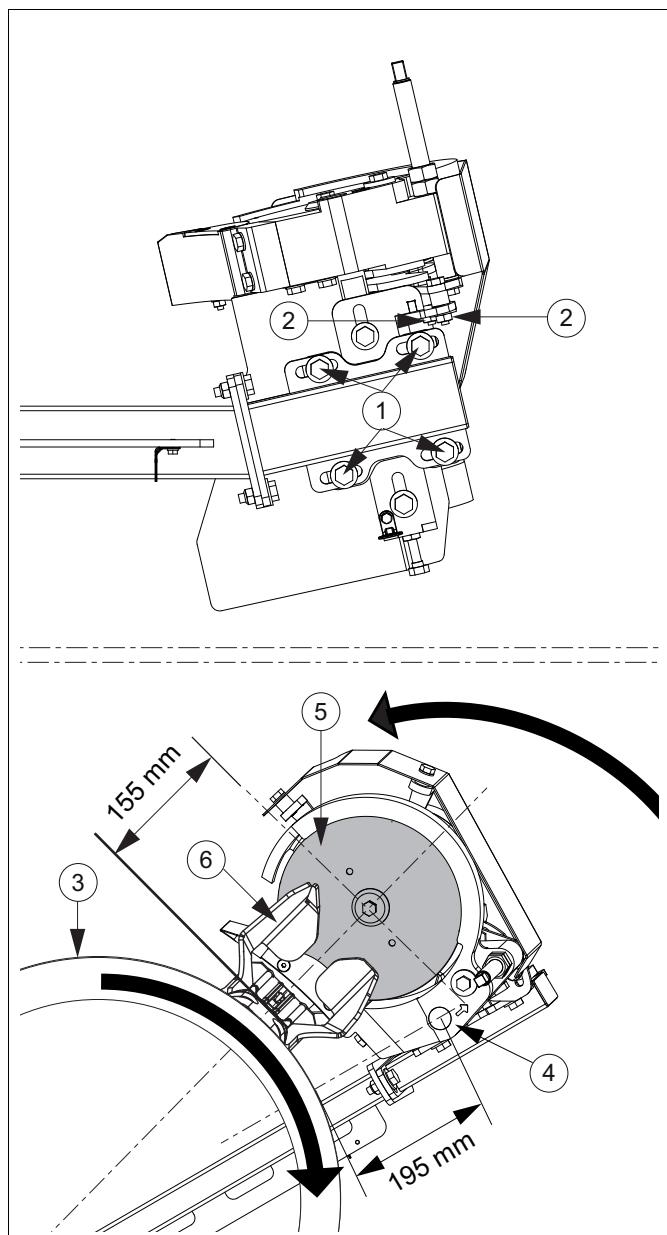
Adjust Neck Skin Cutting Module - horizontal
